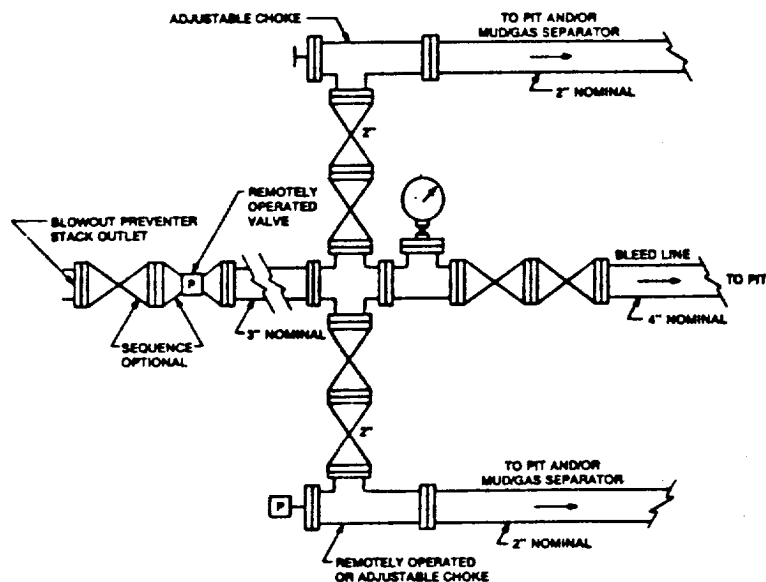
Typical choke manifold assembly for 5M rated working pressure service — surface installation.
